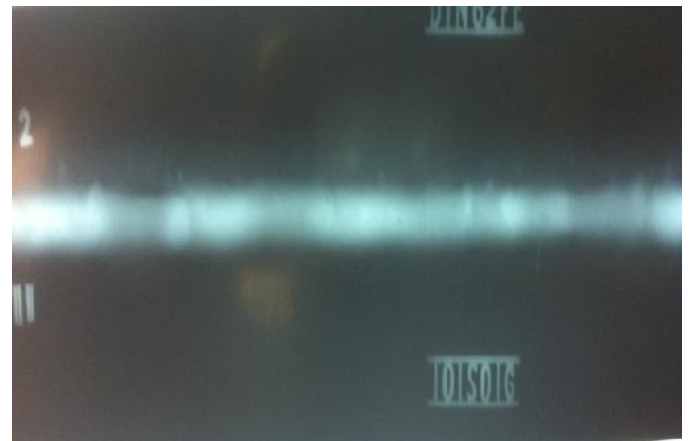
X-ray radiography of high heat input welded plates
